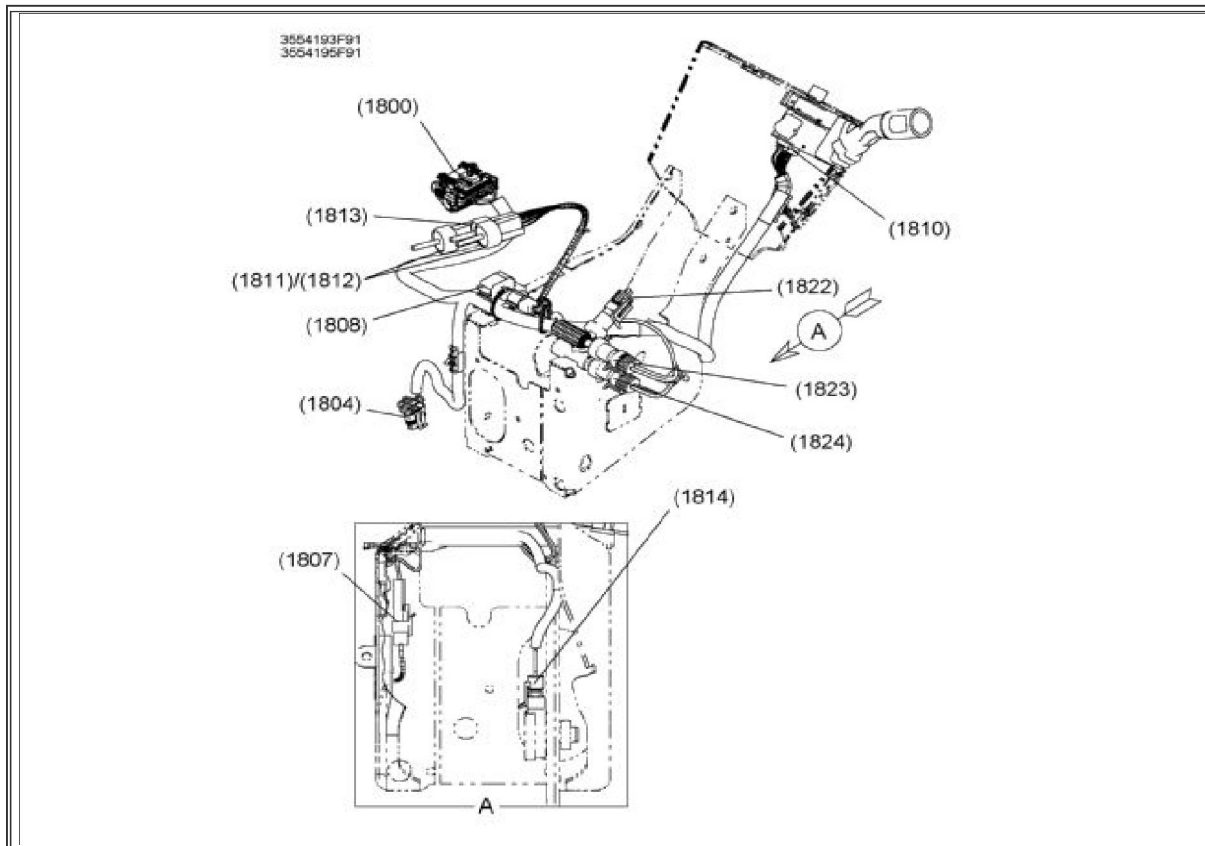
Air Park Brake Switch Location (Steering Column Support View)
